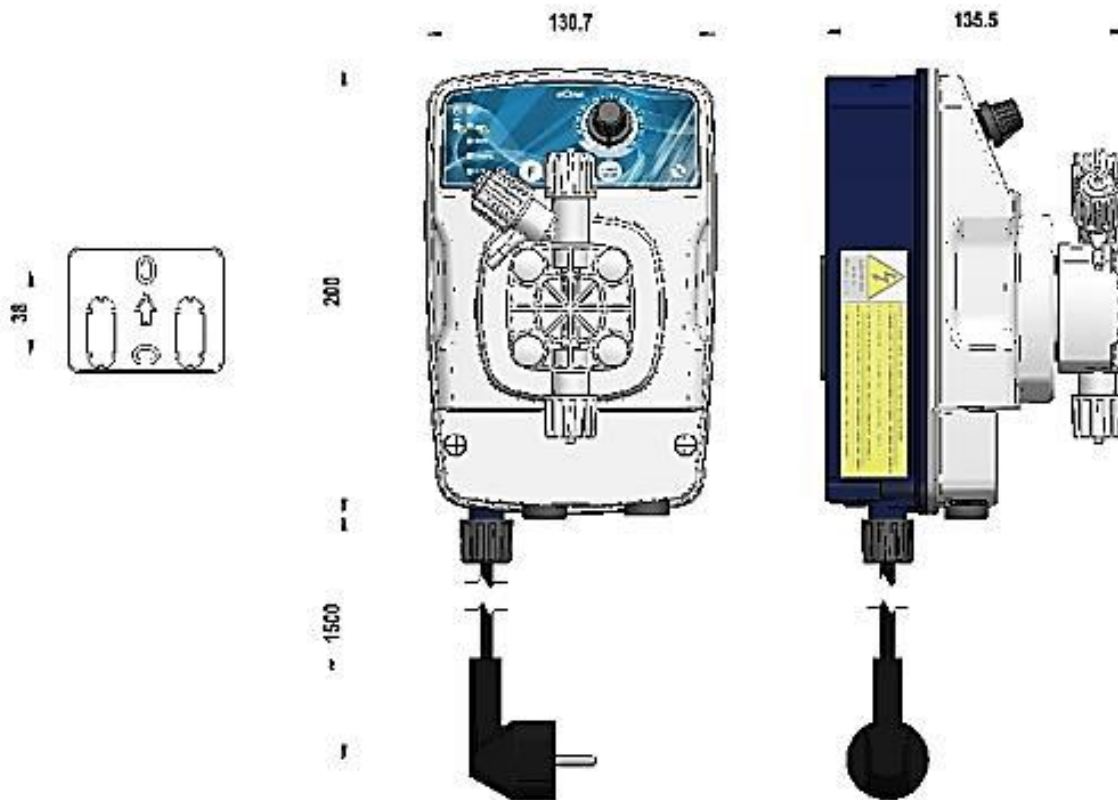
Dimensions in mm. Plate for wall mounting.
